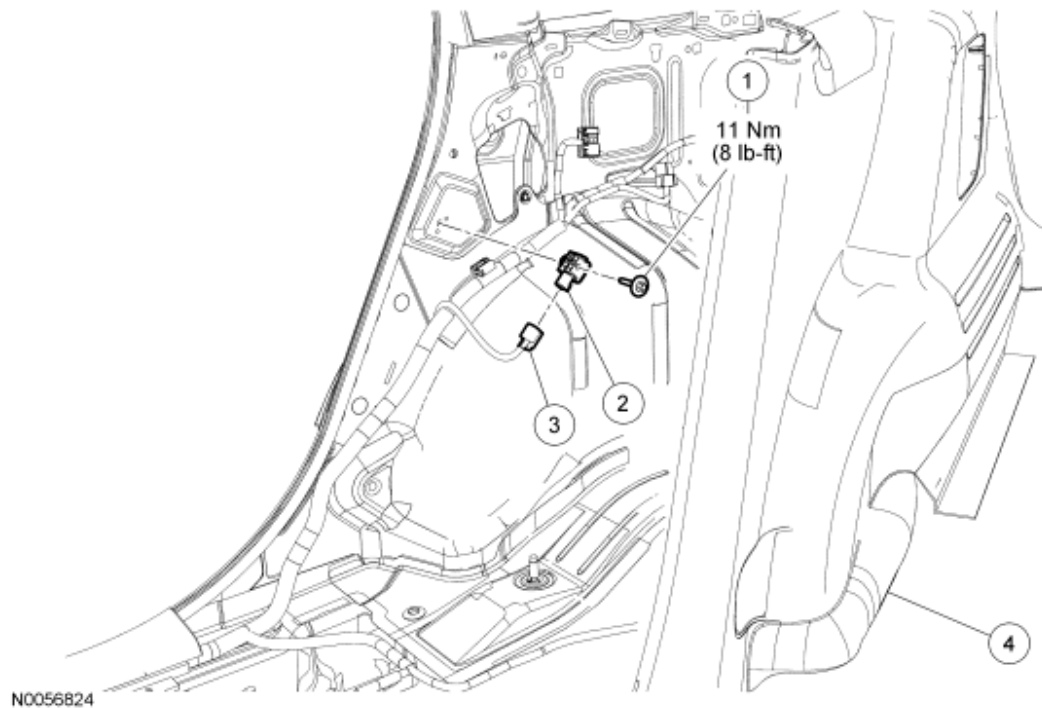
Exploded View Of Side Impact Sensor - C-Pillar With Torque Specification
